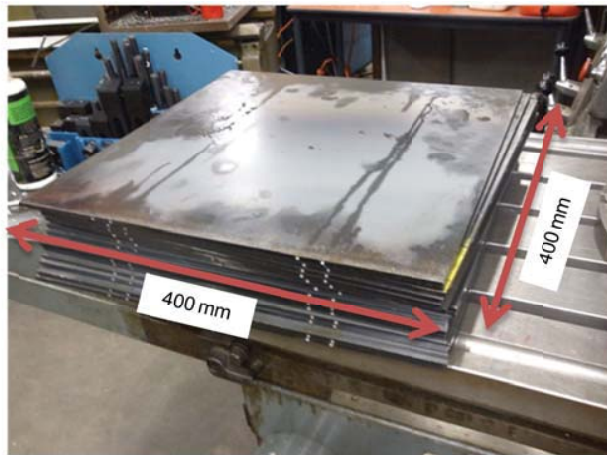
Cut and drilled steel plates by the UTS engineering workshop
